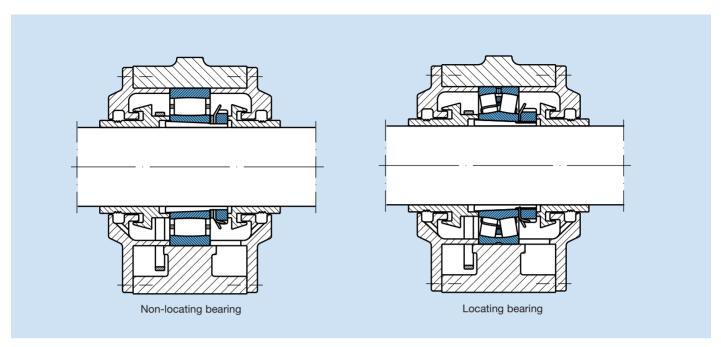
Overhung centrifugal fan, coupling drive, SOFN housing
